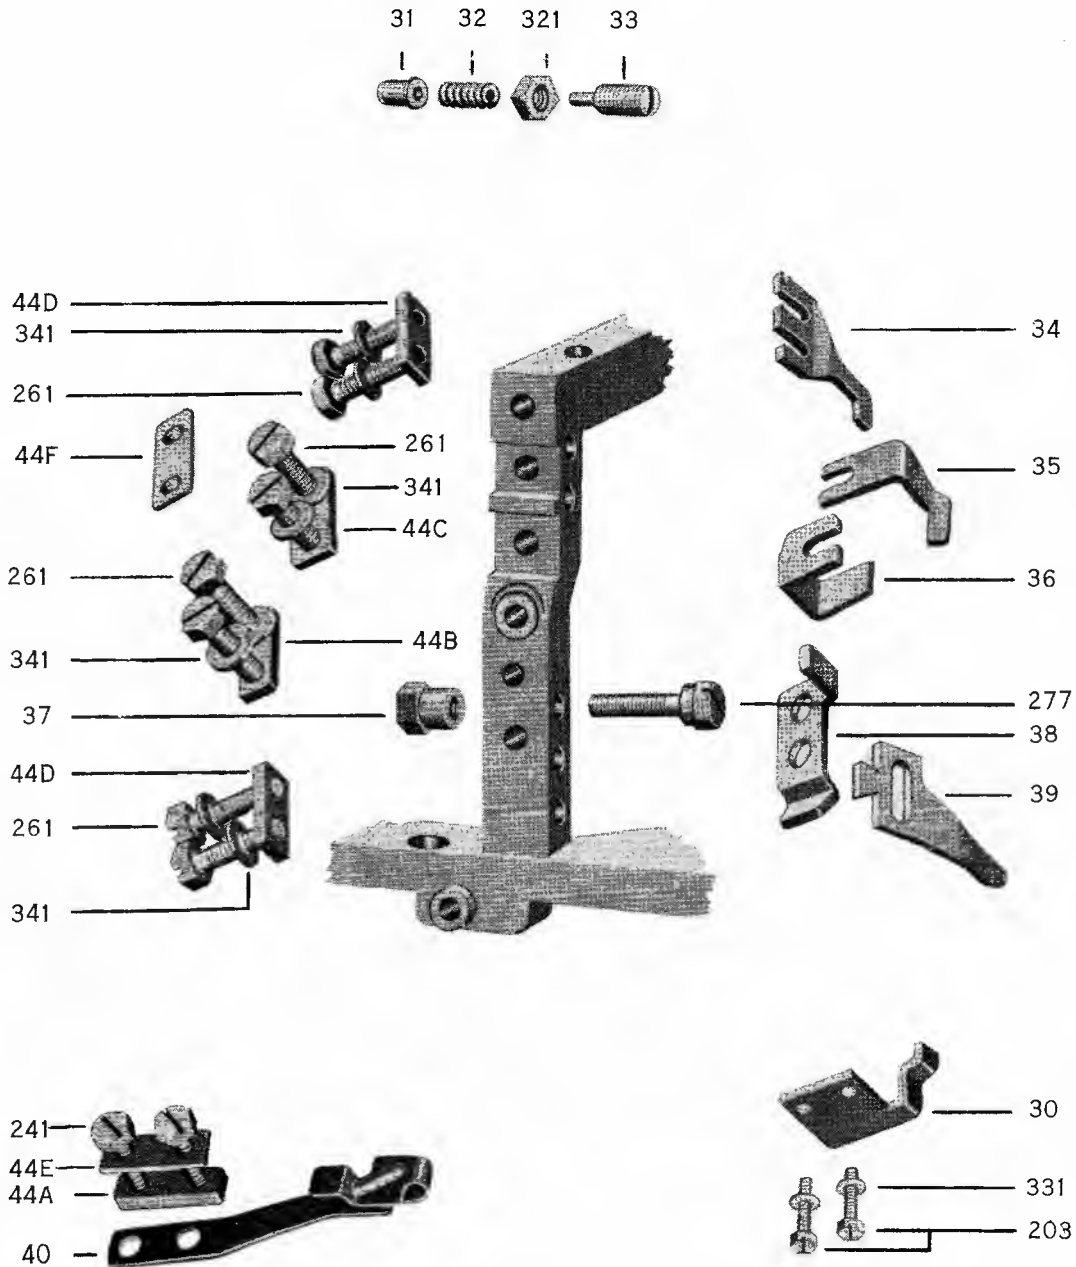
FRAME ASSEMBLY SMALL PARTS.
